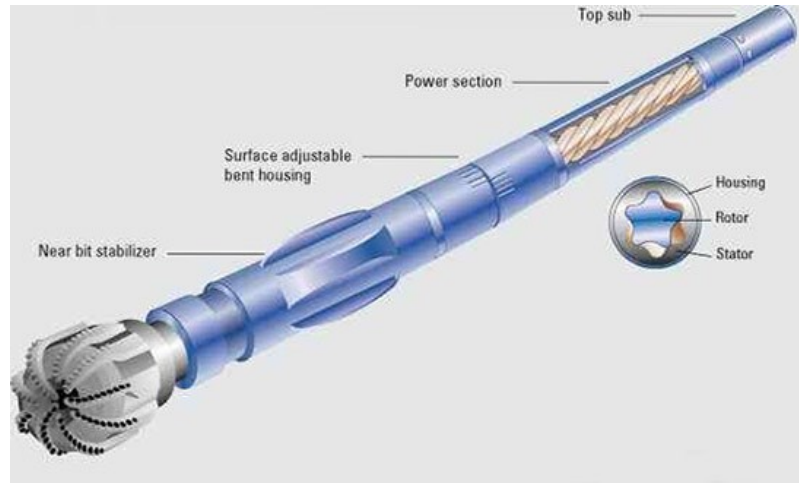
Working parts and diagram of the scroll pump and compressor engine (MM). [3]
